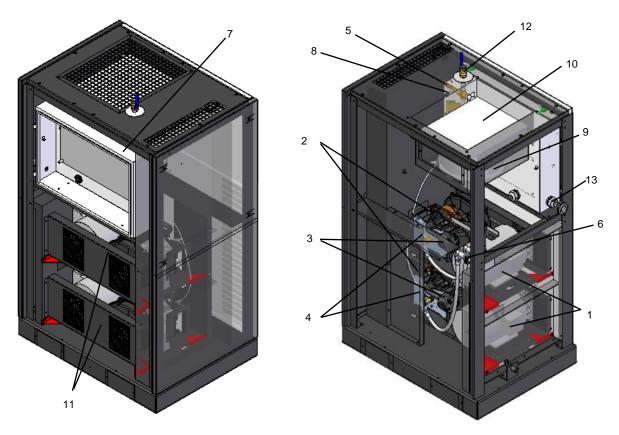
Overview of the assemblies: Oil-free scroll compressor 7.5 kW
